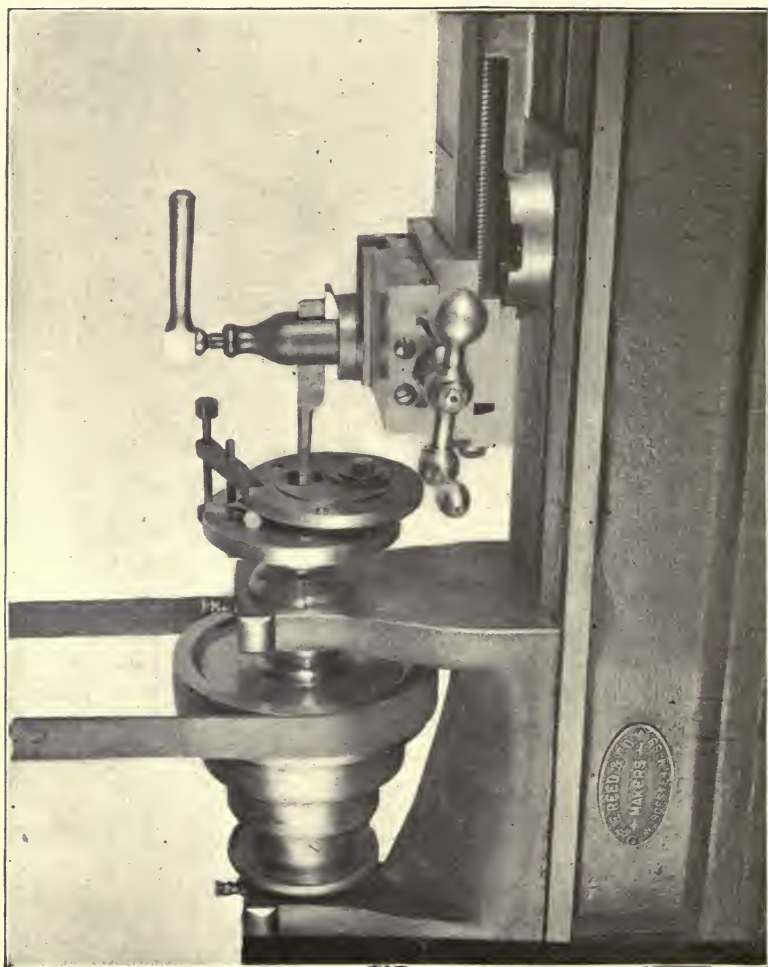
BORING CYLINDER HEAD FOR INLET VALVE.
